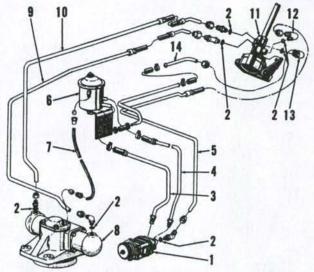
View showing hydrostatic power steering system used on 8000 and 9000 models and early 8600 and 9600 models. Note that tube (9) from left end of steering motor (8) is connected to lower port on front side of Hydramotor steering unit (11) and is connected by long fitting to offset connecting nuts. Pressure tube (5) from pump is connected to left side port of Hydramotor unit by elbow (12); elbow (13) is fitted in rear port of Hydramotor unit and connects to return tube (14) to reservoir. Refer to Fig. 5 for later system.
